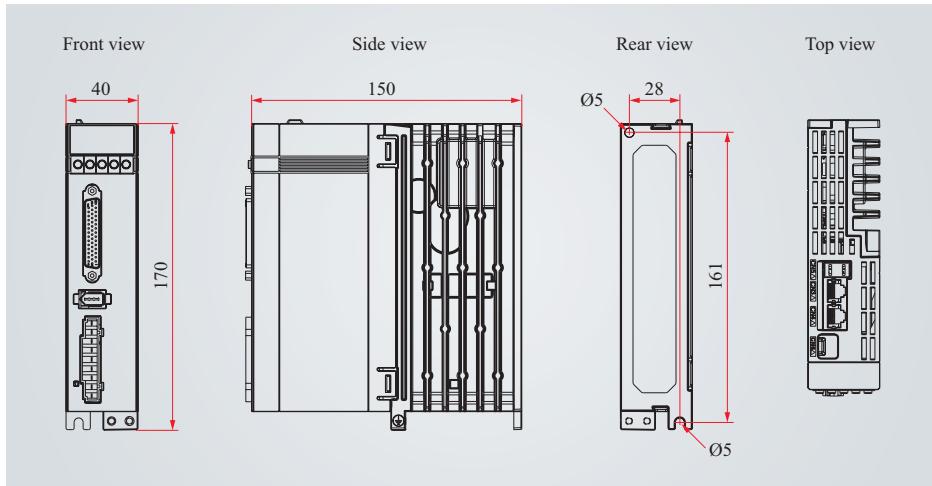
Installation dimensions for SIZE A (unit: mm)
